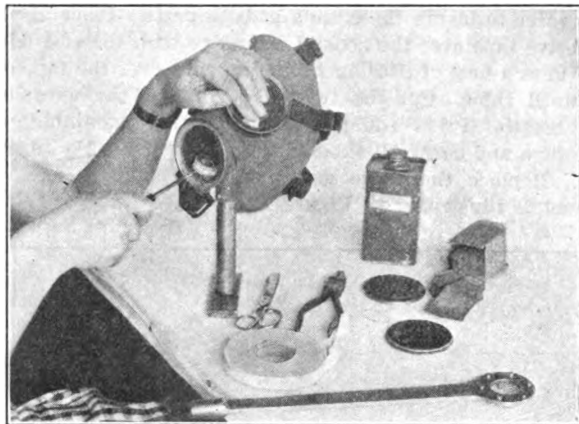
Replacing outlet valve on diaphragm face piece
